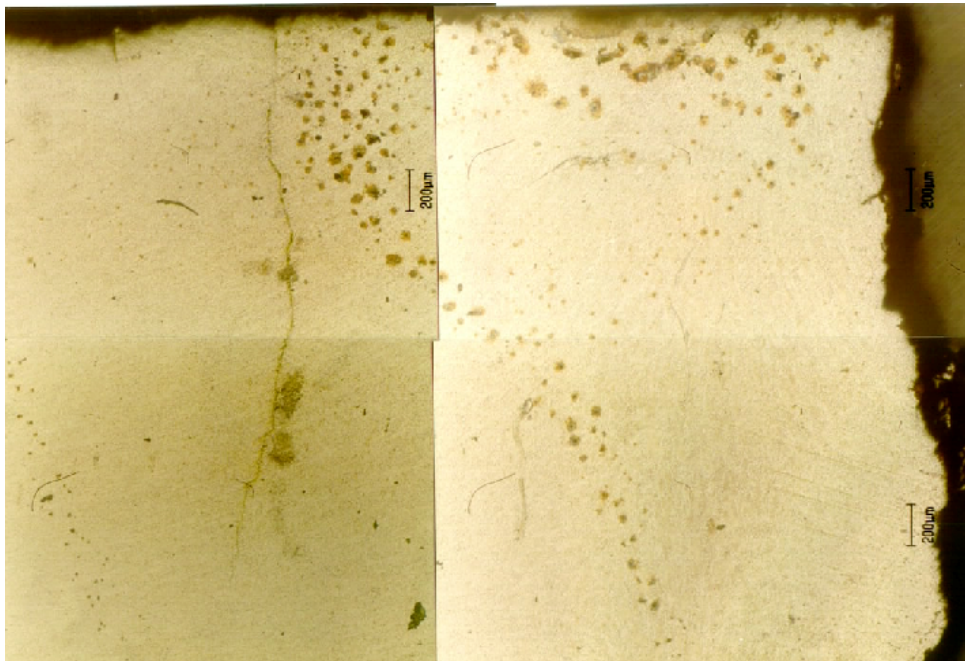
fractographic section of the failure origin showing the black films
